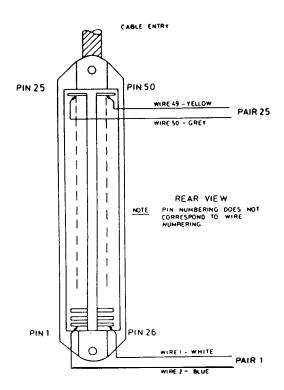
AMP CHAMP CONNECTOR — CABLE TERMINATION
